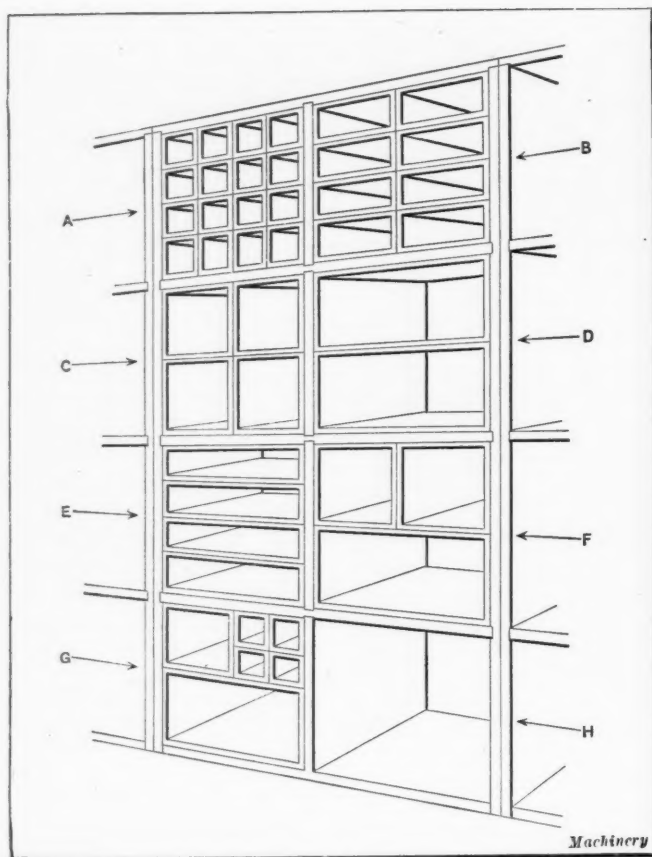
Diagram illustrating Unit System of Construction for Tool Racks
